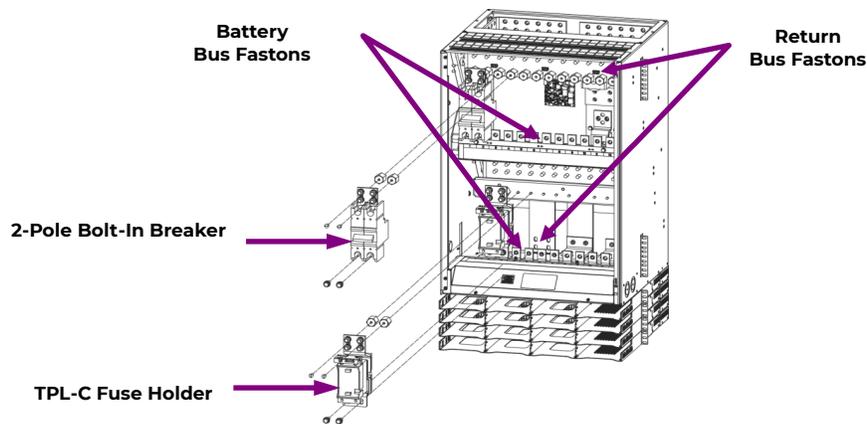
Bolt-In Breaker or Fuse Holder Mounting
